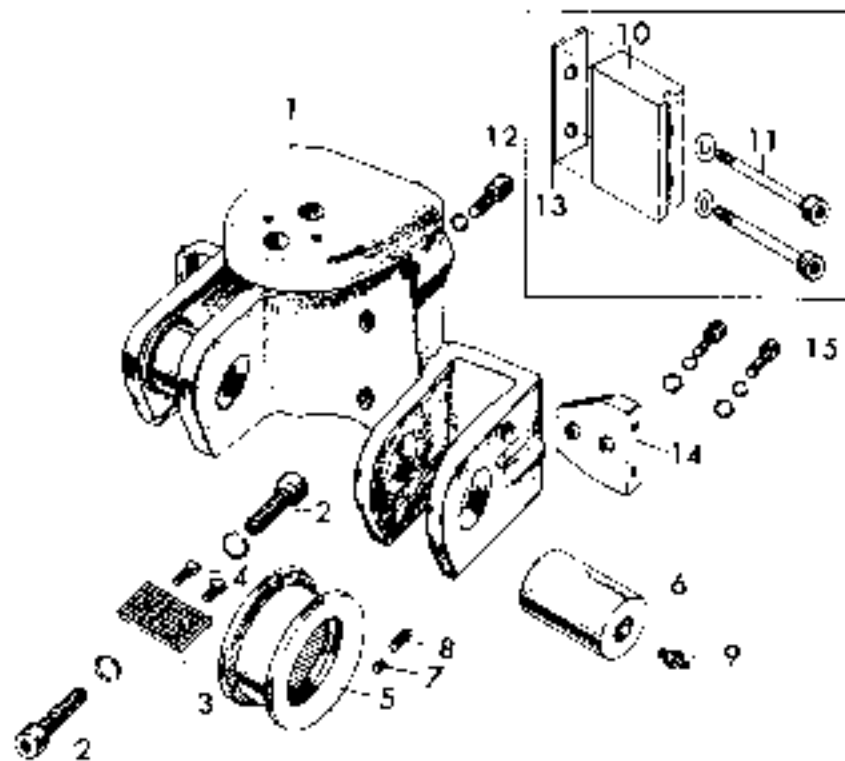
CROSS HEAD FOR UPRIGHT
